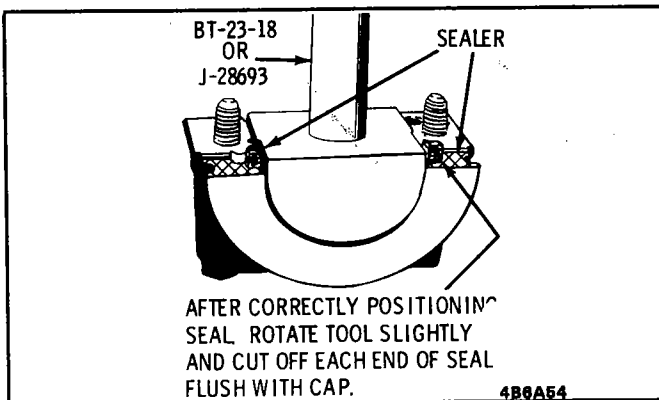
Installing Rear Main Bearing Oil Seal In Cap
